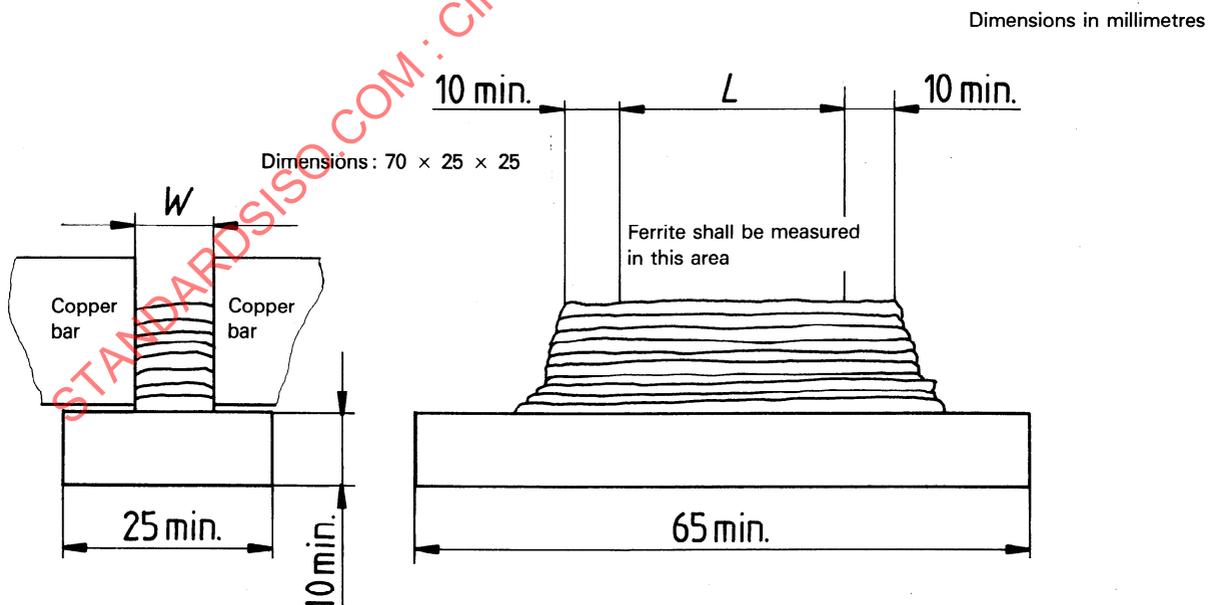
Weld metal test specimen for ferrite determination
